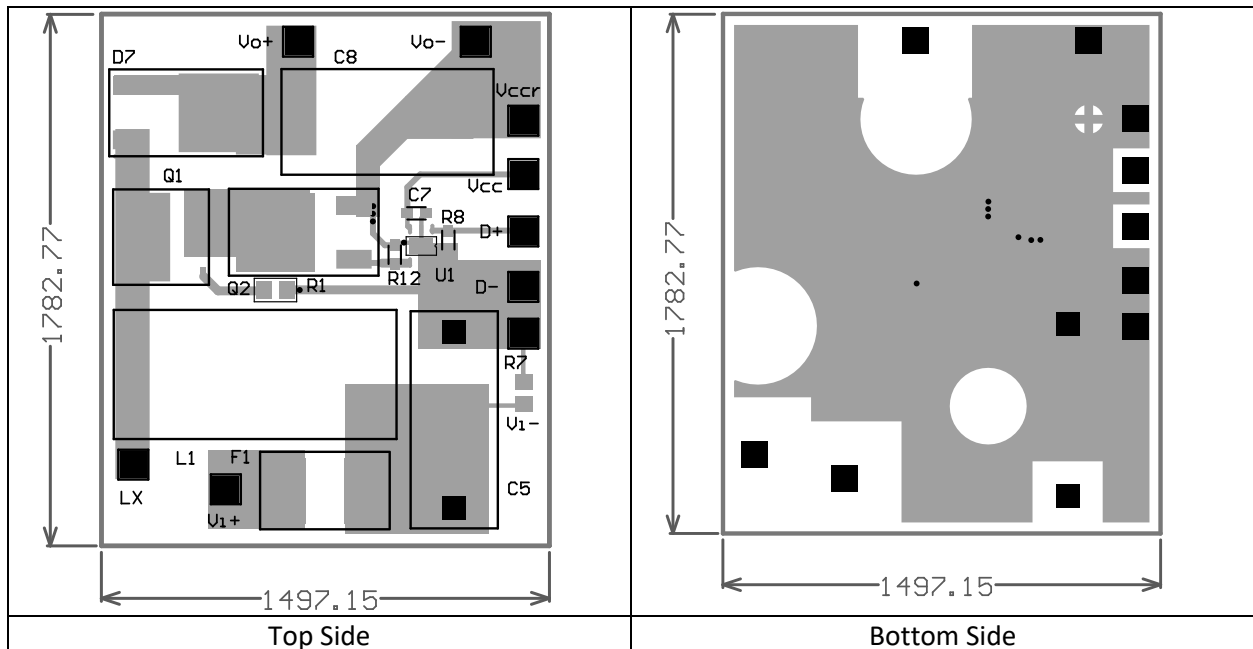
HF Boost Power Stage with Air Core Inductor PCB Layout
